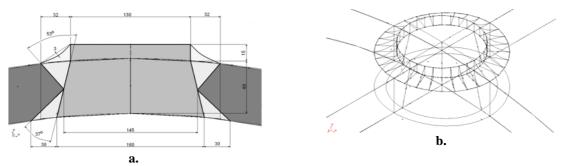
Analysis model corresponding to repair by cutting out a defect enclosing cylindrical core with diameter D = 145 mm, followed by welding of a thick metal patch of size $160 \times 130 \times (60+15) \text{ mm}$: a. Cross-section through a sector of the mantle showing the 2D geometry and size of the *cut-plug-weld* assembly; b. 3D view of the FEA solid element generating surfaces at the defect.
